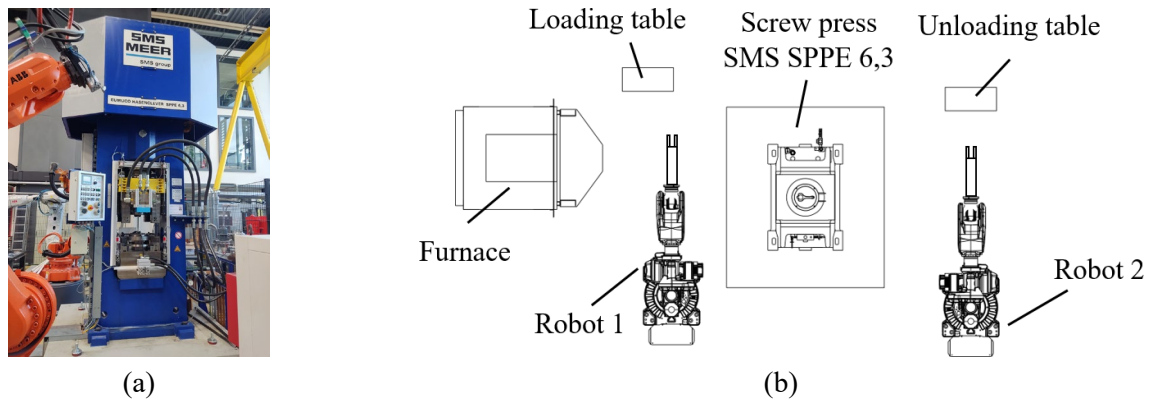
SMS SPPE 6.3 screw press (a) and test setup for automated forging (b)
